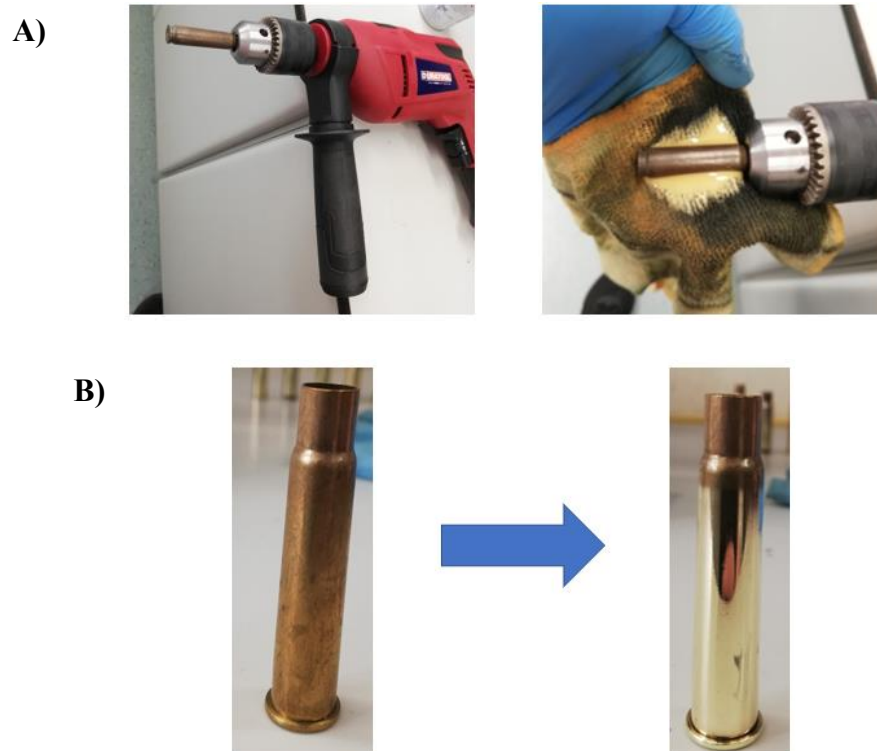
A) Photographs of ammunition casings in a drill B) before and after polishing surface of ammunition casings.
